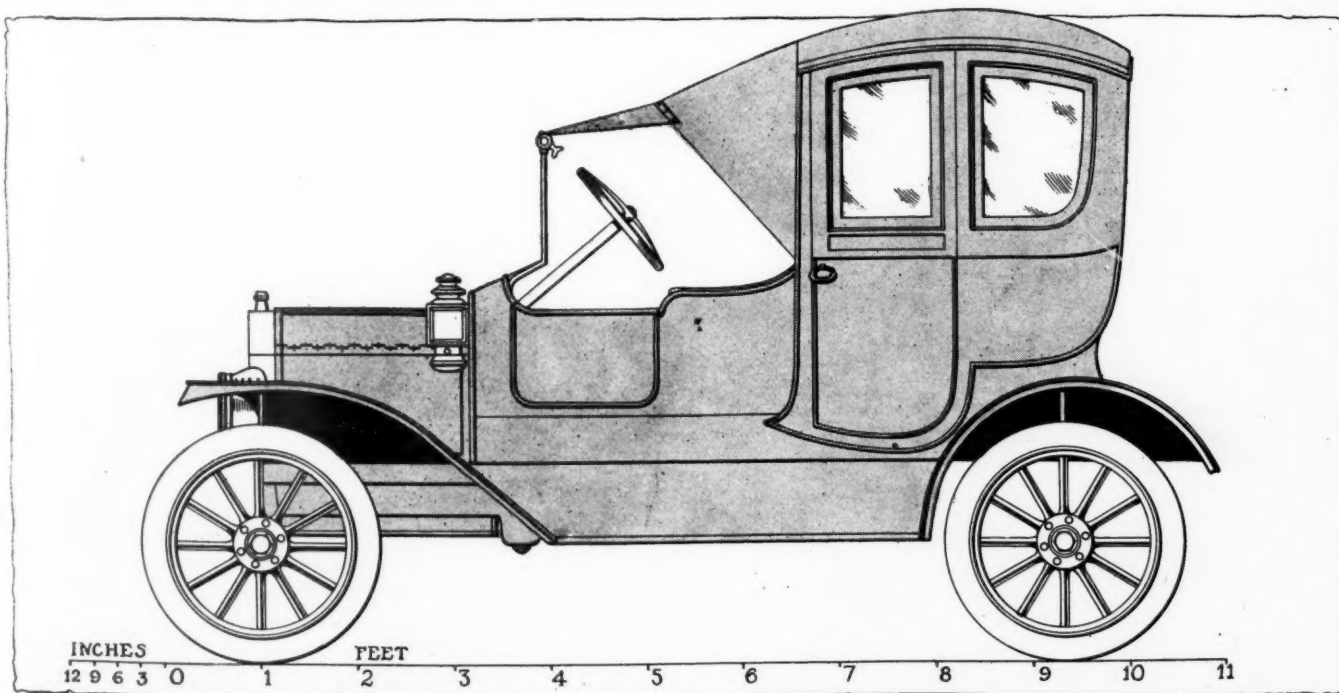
Same coupé body moved back on the chassis to permit of the addition of a fore-body
